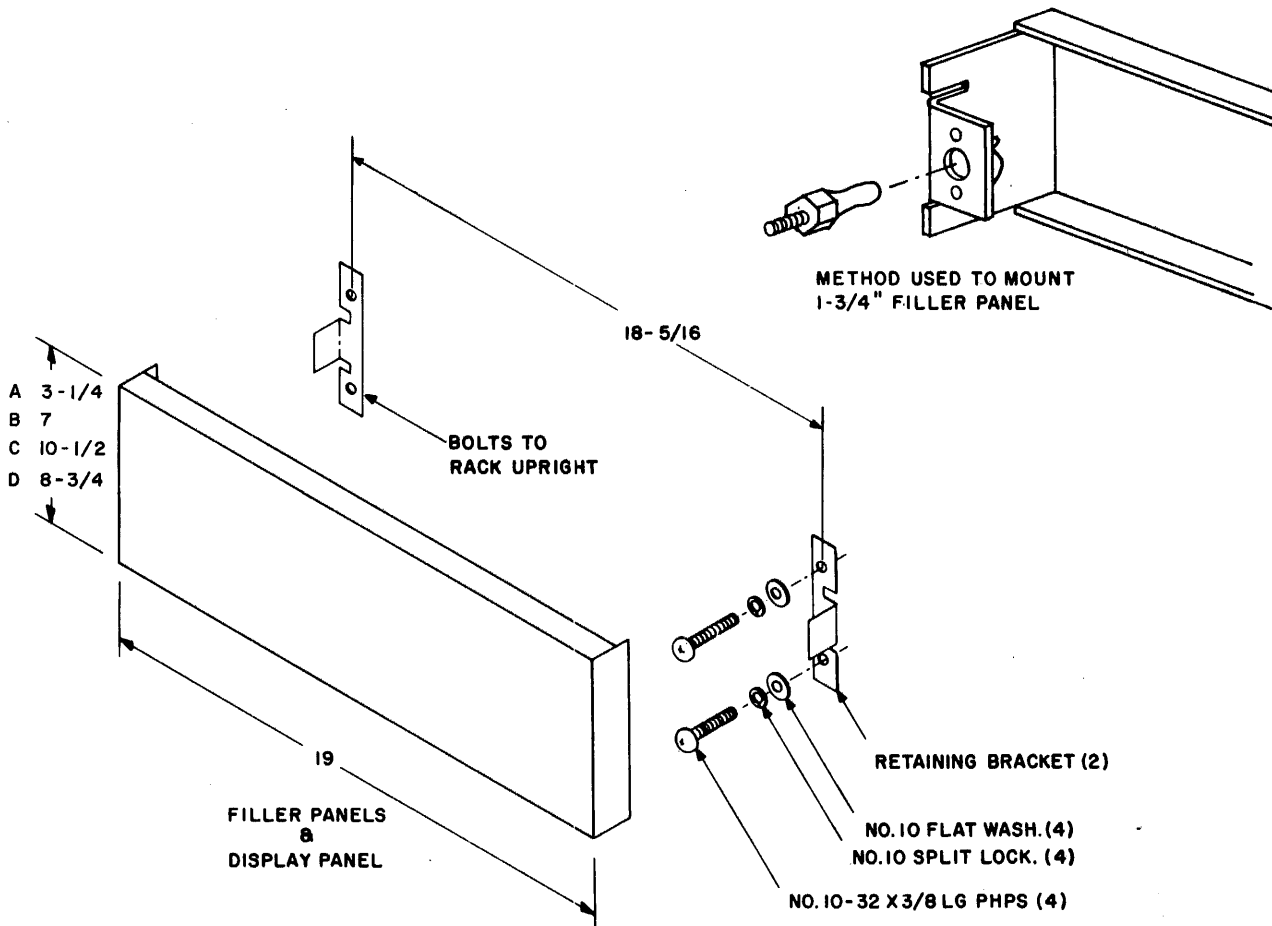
Typical Mounting Configuration for Display and Filler Panels
